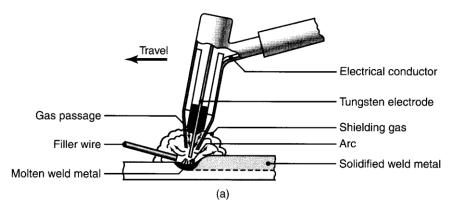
Tungsten Arc Welding Process Schematic drawing (Kalpakjian, 2010)
